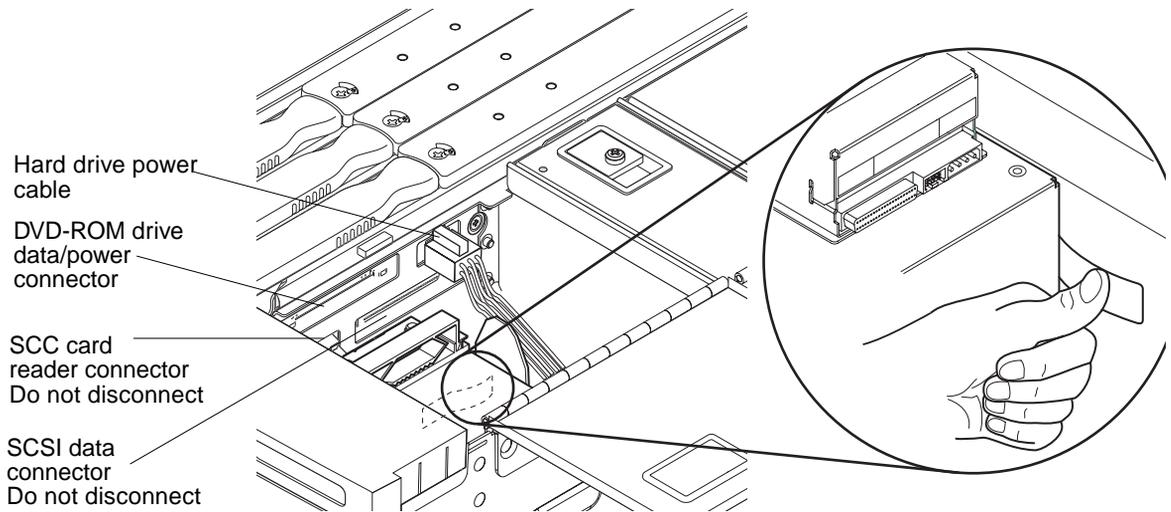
IB_SSC Assembly Cable and Connector Locations, and the Removable Media Module Retaining Spring
